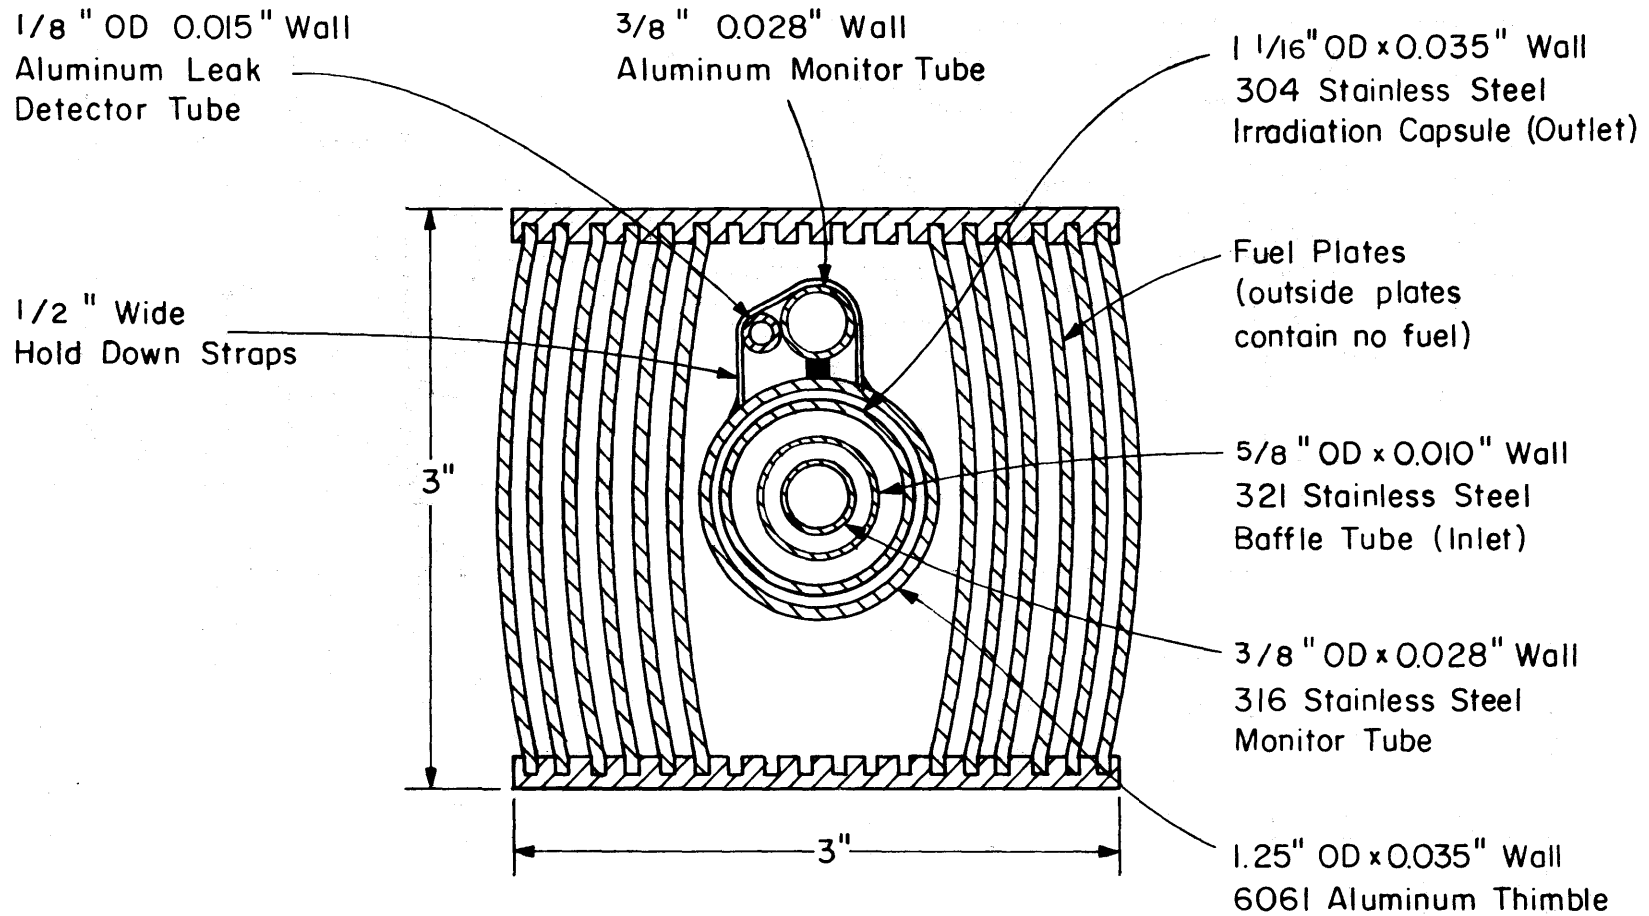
DRAWING OF FUEL ELEMENT CROSS SECTION WITH
